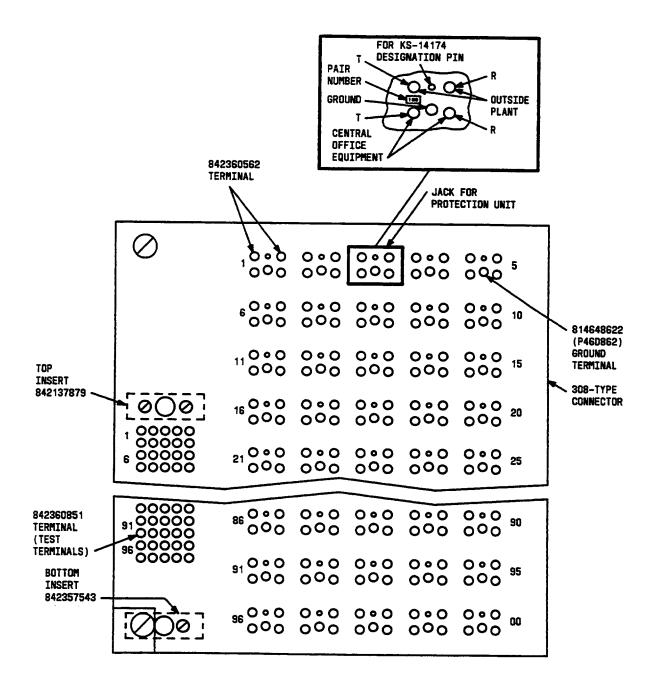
308-Type 1 Connector Panel—Test Connector Threaded Inserts
